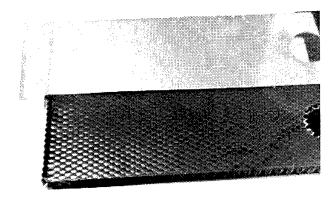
Failure surfaces resulting from peel testing of the Untreated honeycomb and AF130-2 adhesive conditioned 150 days at 70°C/100%R.H., indicating skin to adhesive disbond.
